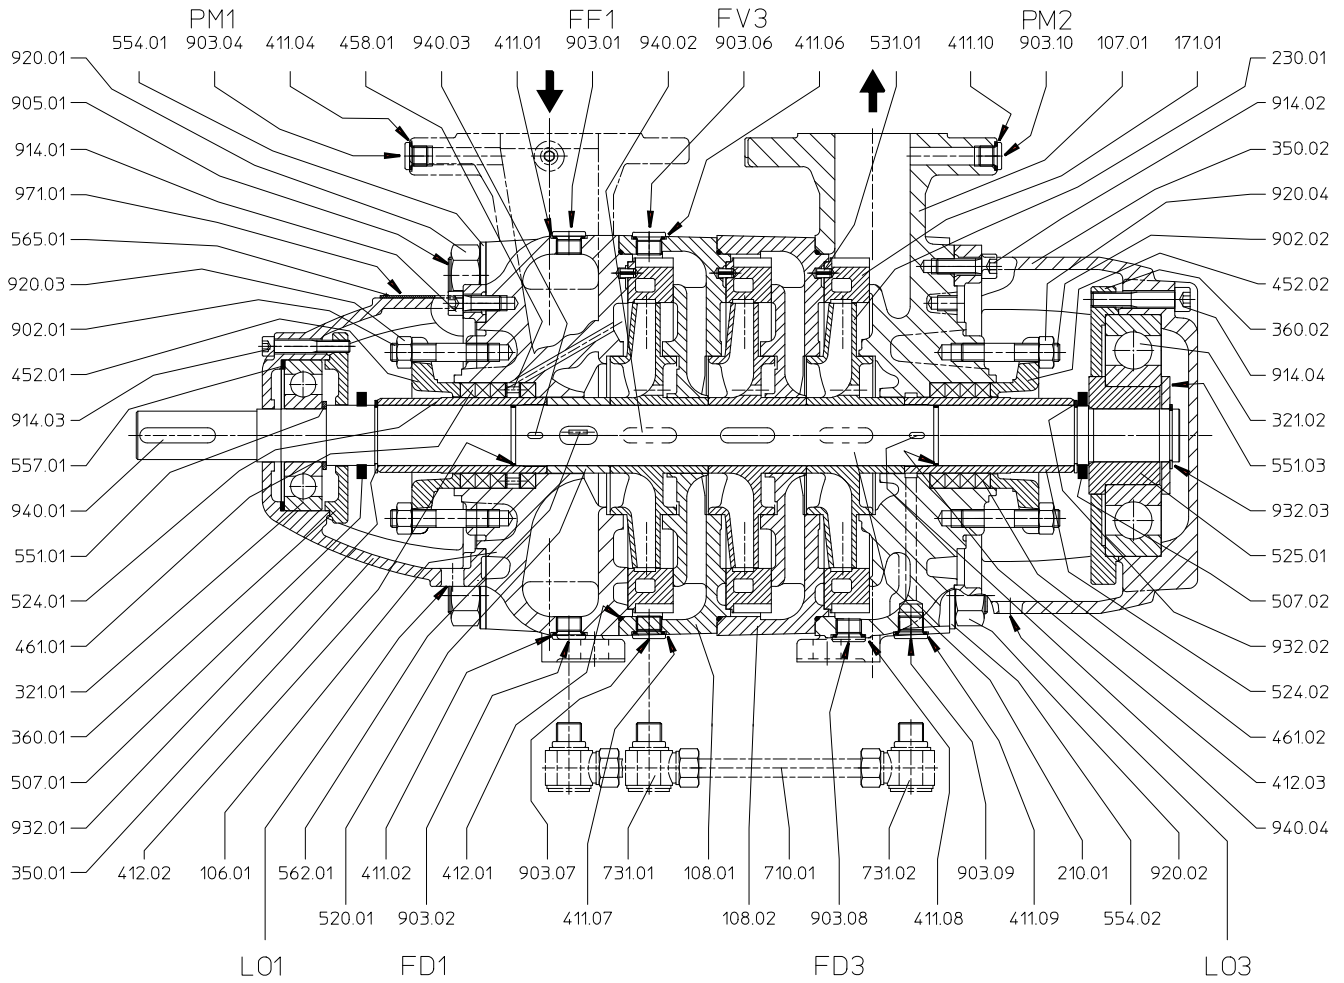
Sizes L 25/32/40/50/65, with uncooled packing gland, version U1BA (suction side with blocking, pressure side without pressure discharge)
